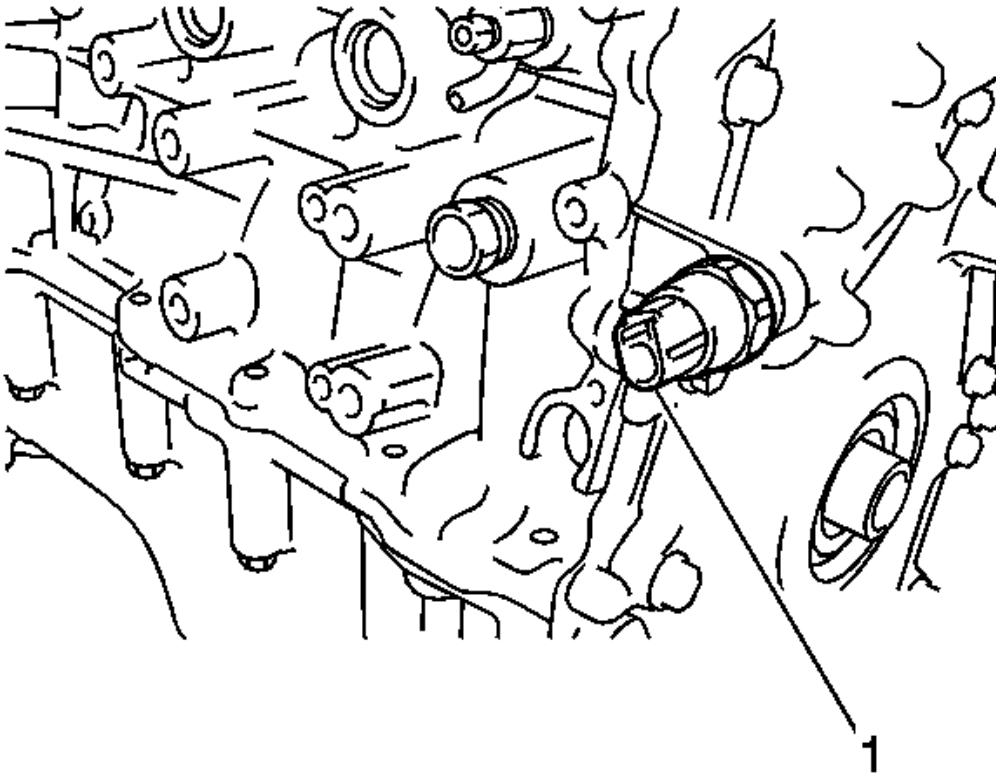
Identifying Engine Oil Pressure Switch Assembly
